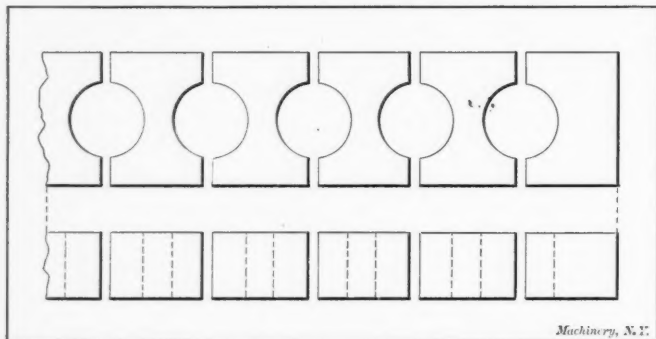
Detail of the Clamping Blocks used in one of the Fixtures shown in Fig. 21
